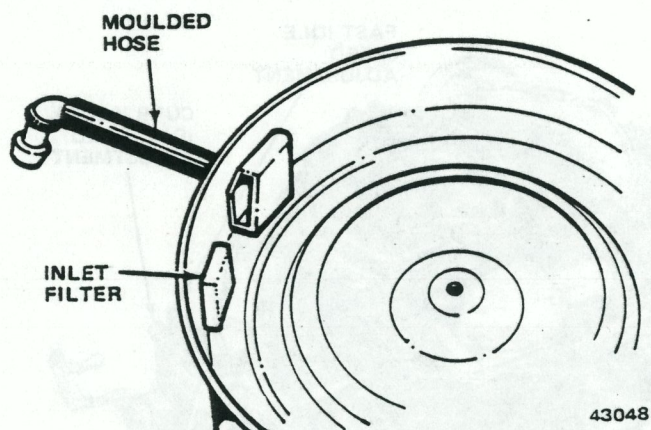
A-11 PCV Air Inlet Filter—Four- and Six-Cylinder Engines
